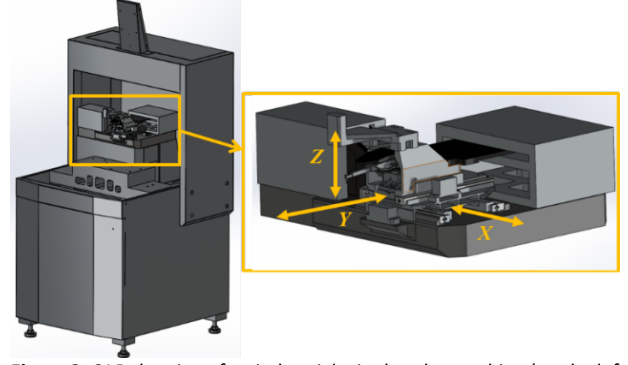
CAD drawing of an industrial wire bonder machine (on the left-hand side) and its XYZ-motion platform (on the right-hand side).
